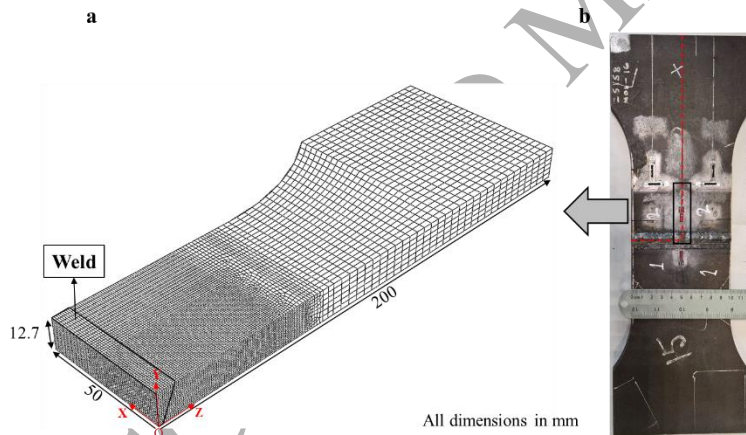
The butt-welded specimen design: (a) A quarter Finite Element (FE) model showing the dimension and meshing used for all iterations (b) A photograph of the butt-welded plate.
